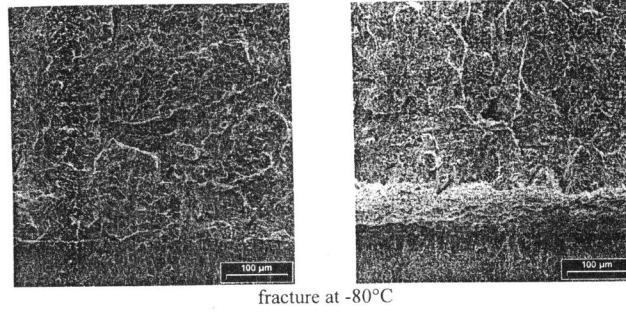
Fracture surfaces of the steel 10MnMoNi5-5 without and after prestressing
